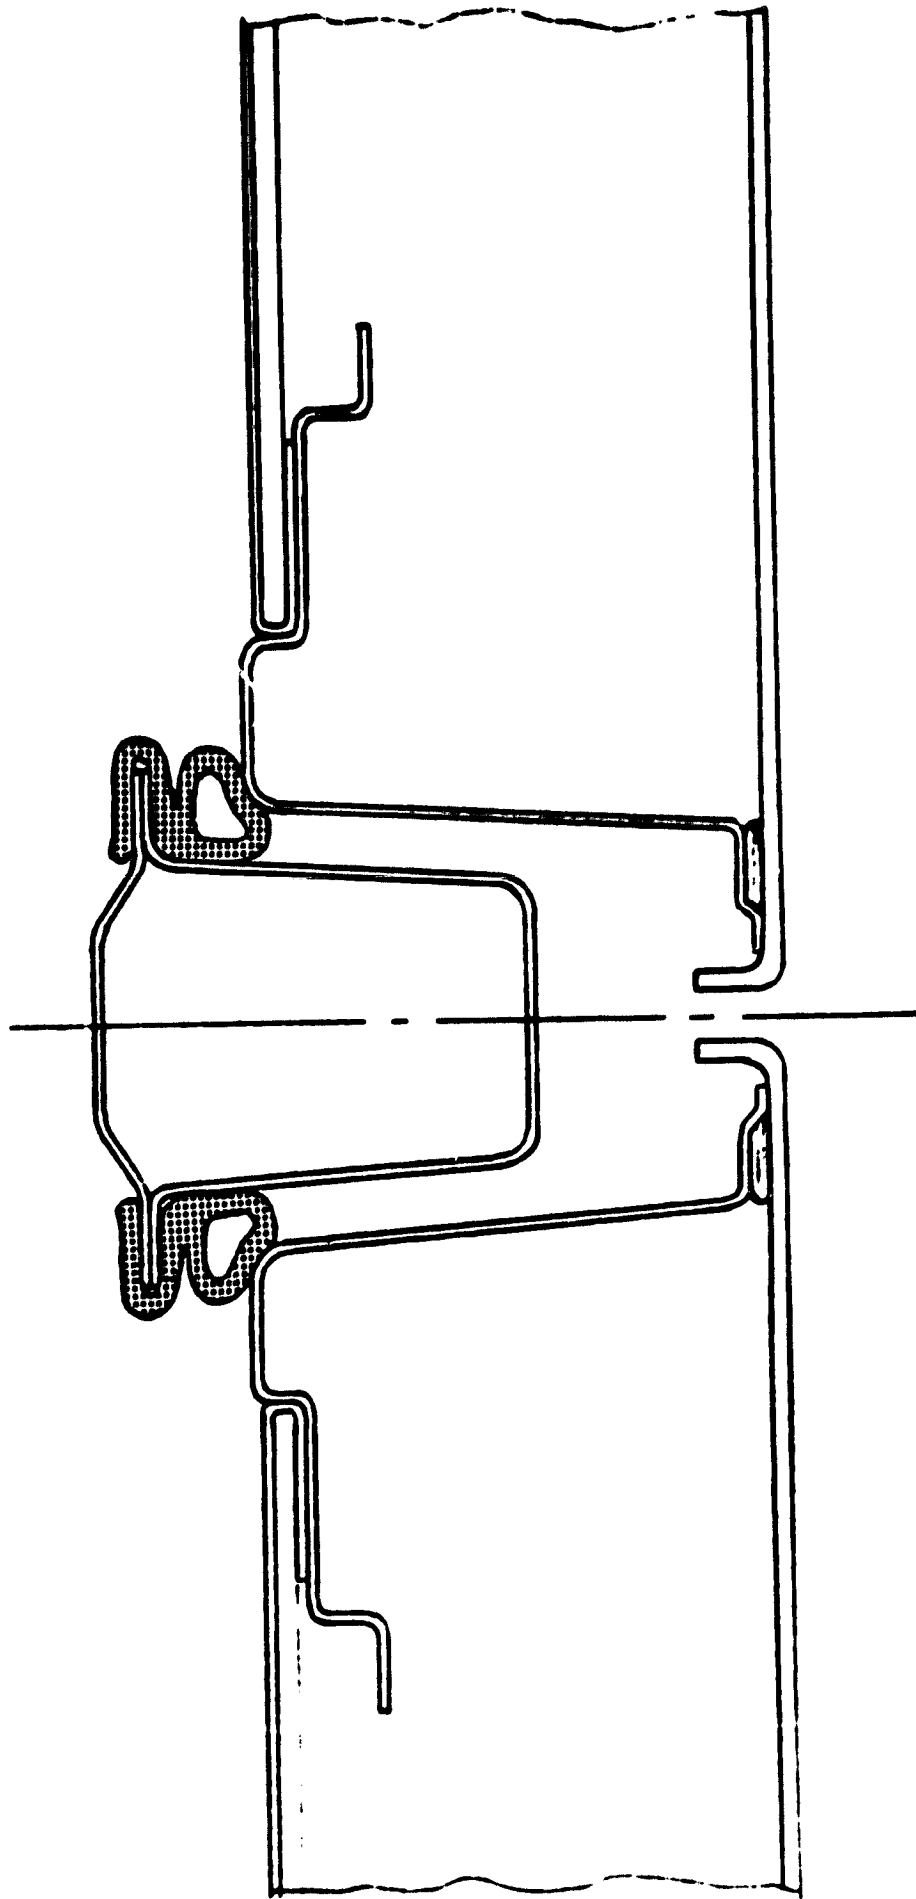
LOWER CENTER PILLAR SECTION
